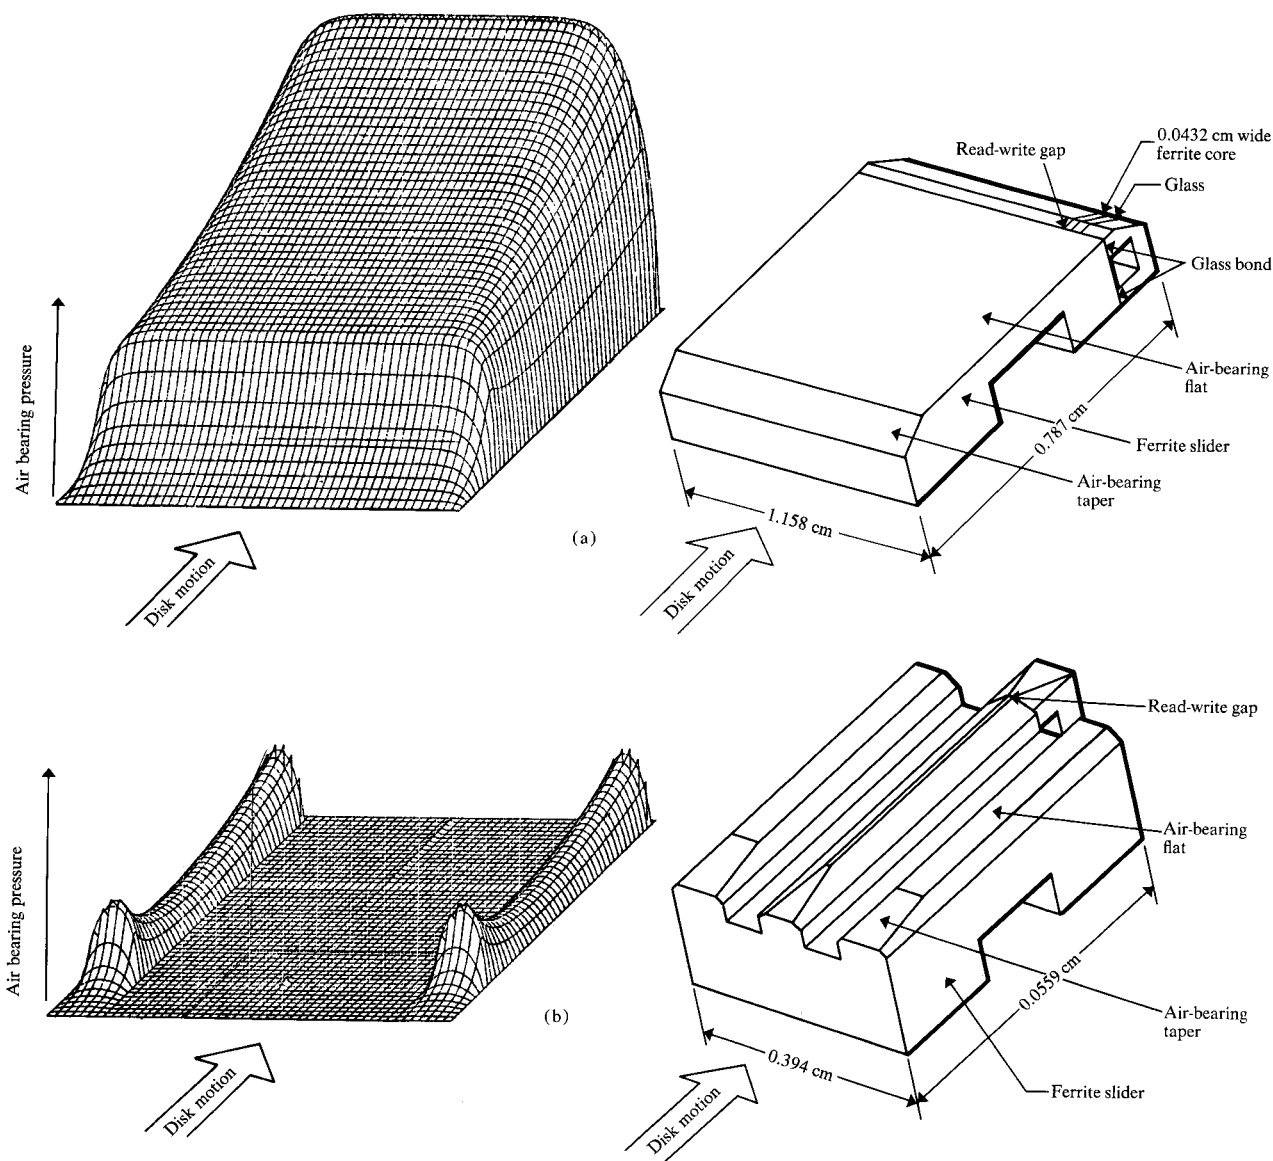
Pressure profiles of read-write heads. (a) Profile for the IBM 2305 head, which is designed with single taper-flat air bearing; (b) profile of IBM 3348 head, with tri-rail ferrite slider.
